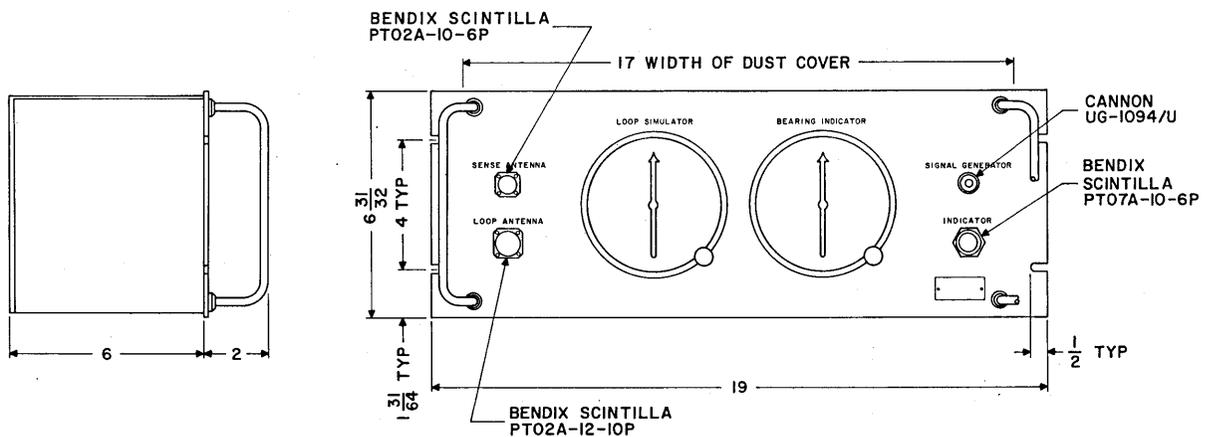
477U-2 ADF Antenna Simulator, Outline and Mounting Dimensions
